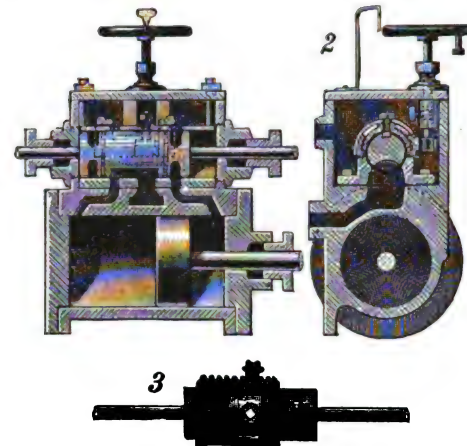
HAND ADJUSTABLE CUT-OFF.
